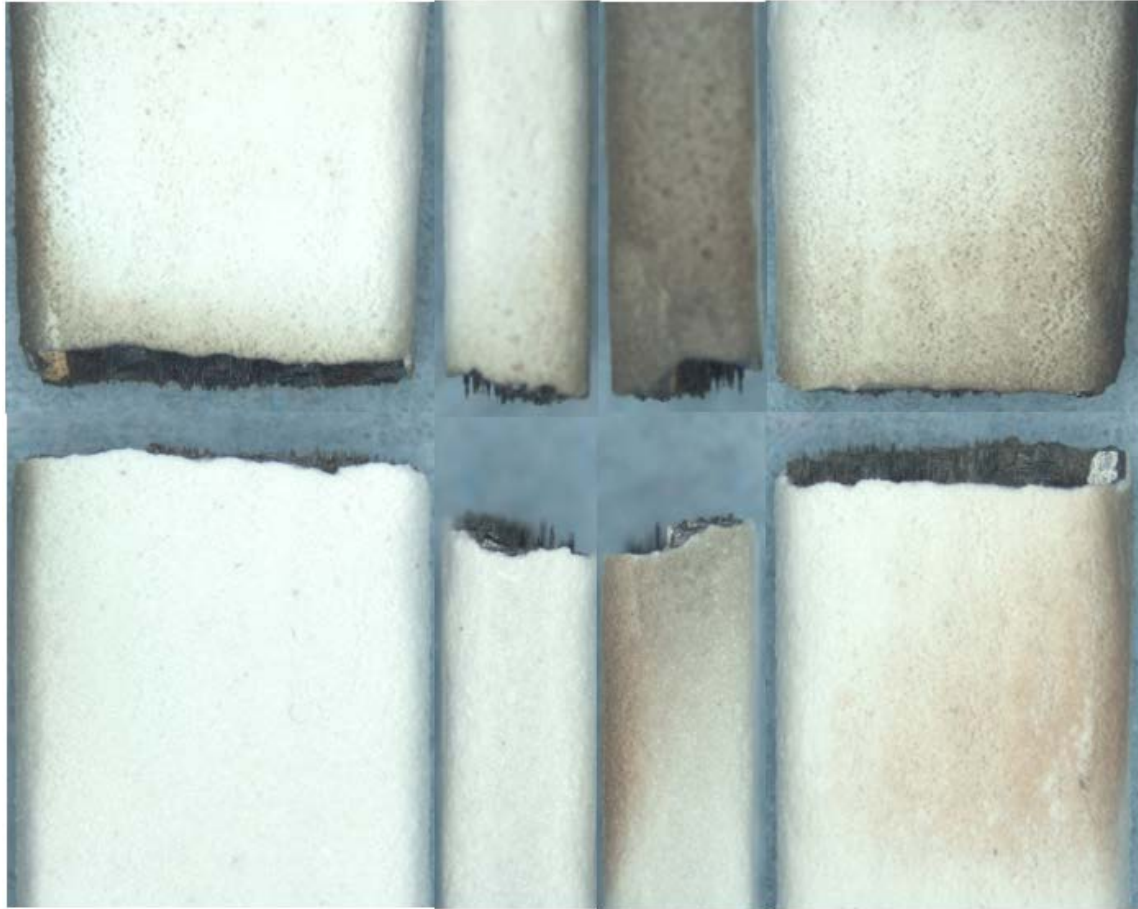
Fracture surfaces of specimen P15002-5, tested in fatigue at 1200°C in air.
